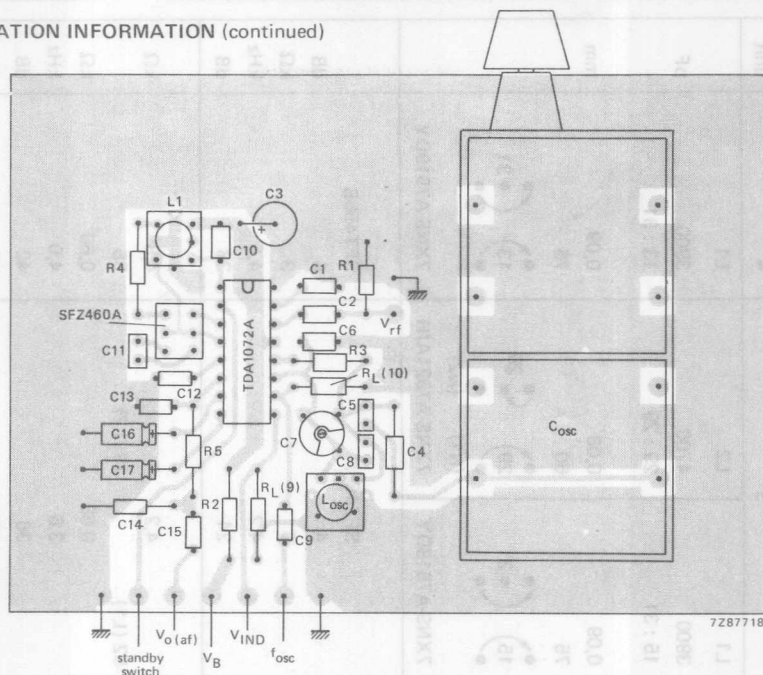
Printed-circuit board component side, showing component layout. For circuit diagram see Fig. 1.
